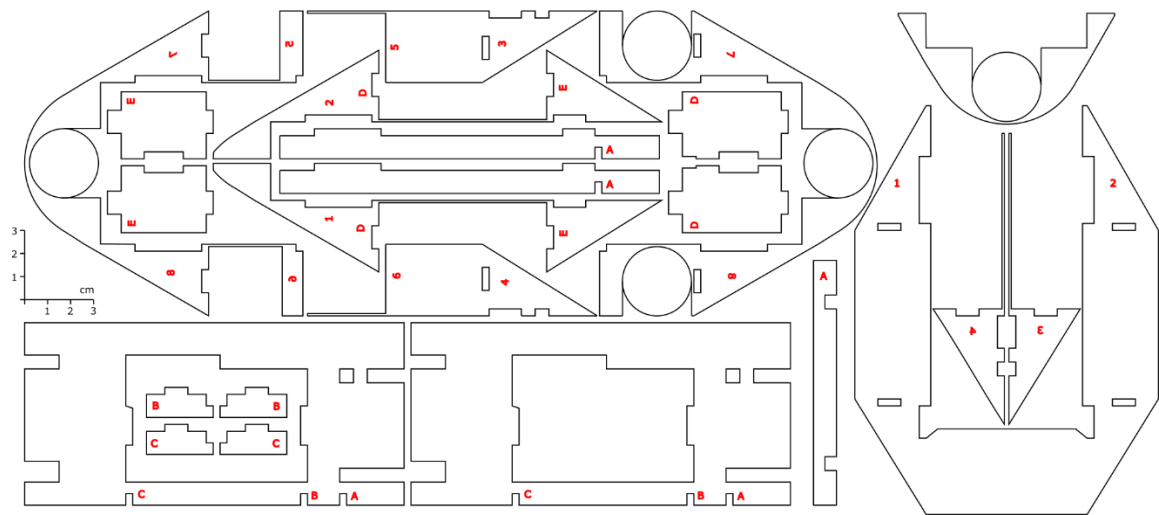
2D template for the three restraint supports. This image is laser cut onto 3 mm Perspex and assembles using plastic weld glue. Scale is shown to the right-hand side of the figure (units are in cm).
